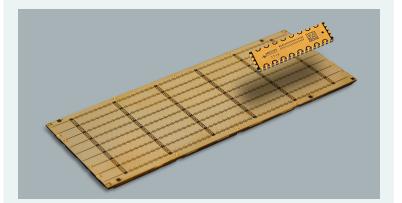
Panel fabrication process enabling configurable CM-ChiP packaging
